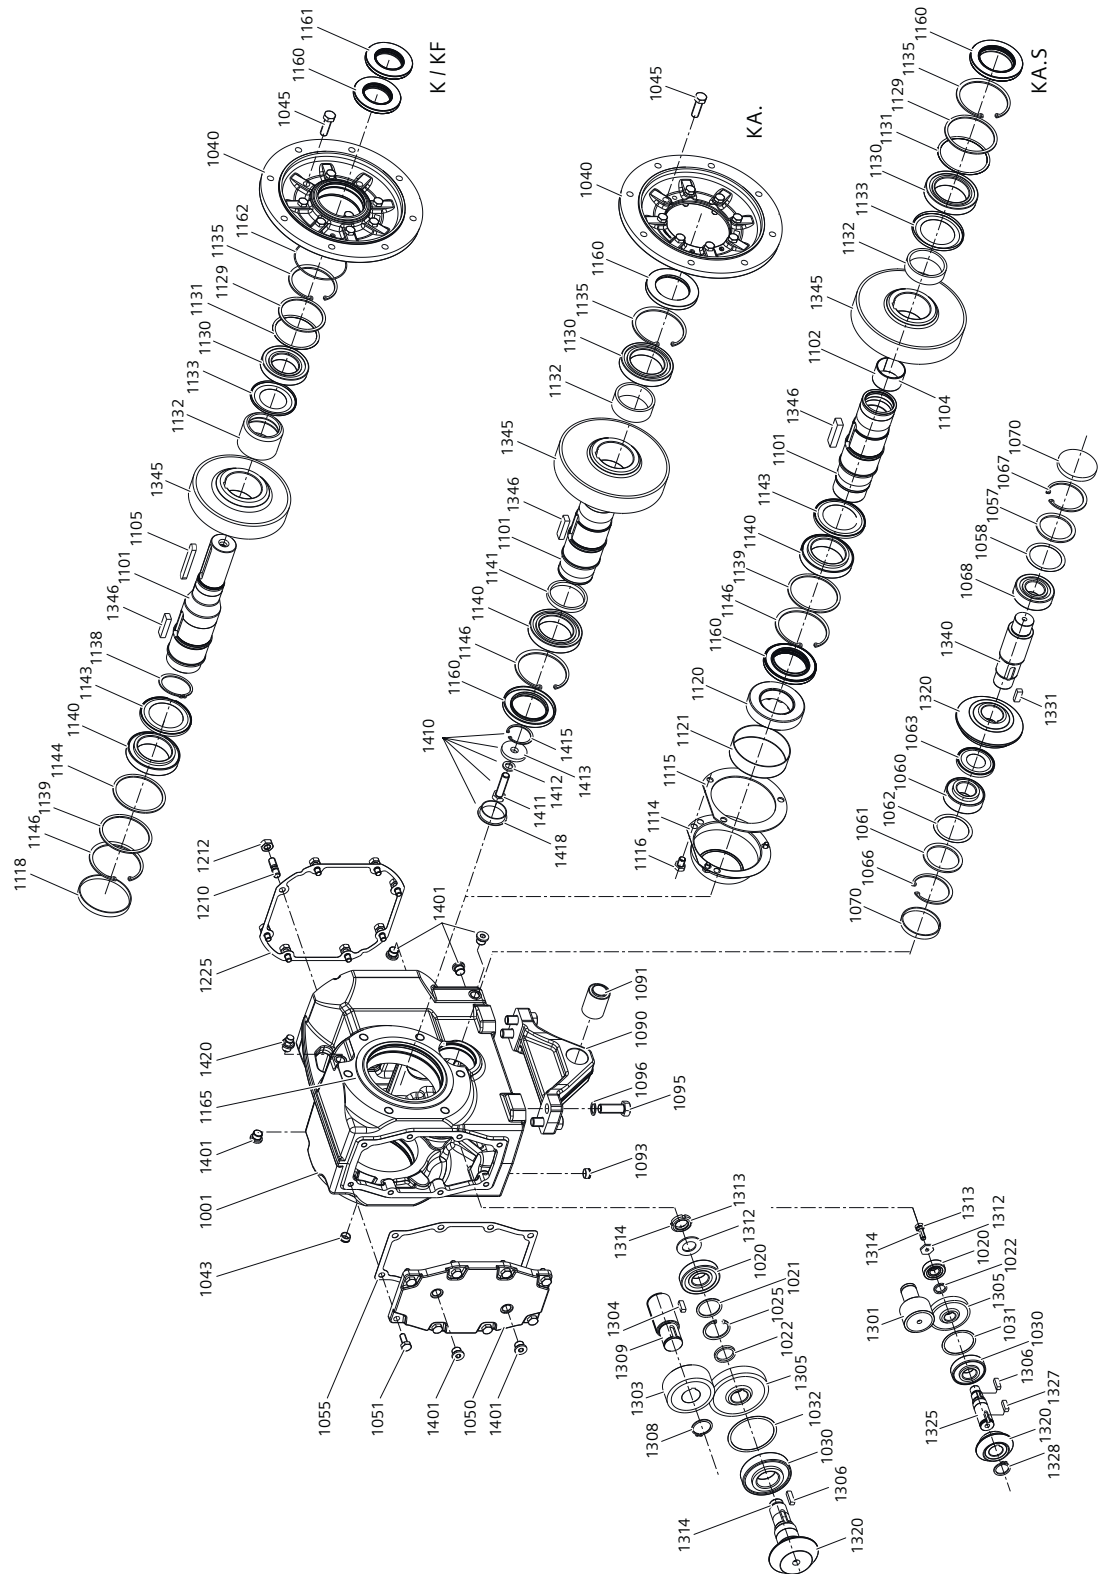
Bevel gearbox K, sizes 39 - 189
